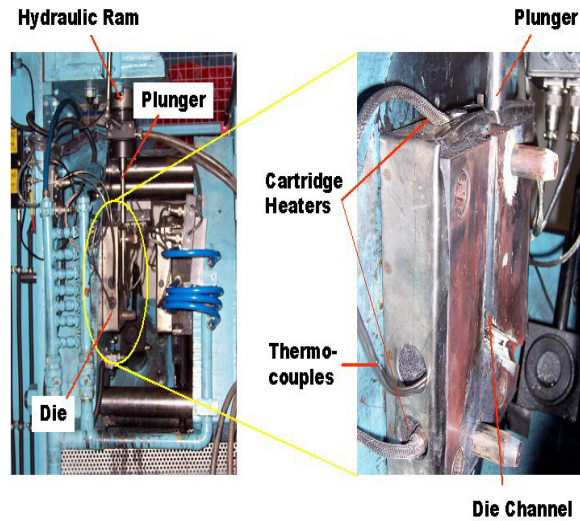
Photograph of an ECAE die used by the Materials Department at the University of Manchester in the United Kingdom ([www.manchester.ac.uk](http://www.manchester.ac.uk), 2007)
